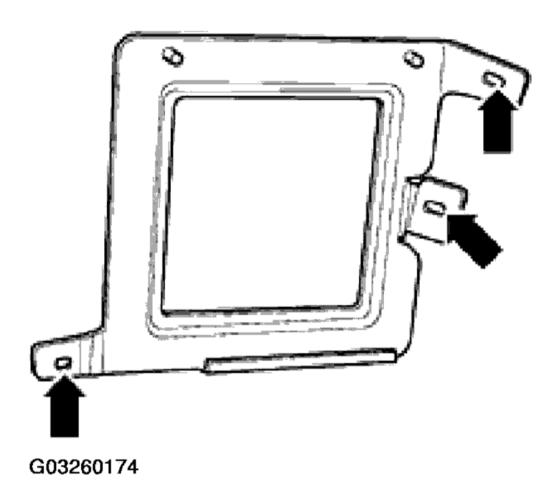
Removing And Installing Amplifier Bracket Courtesy of VOLKSWAGEN UNITED STATES, INC.
